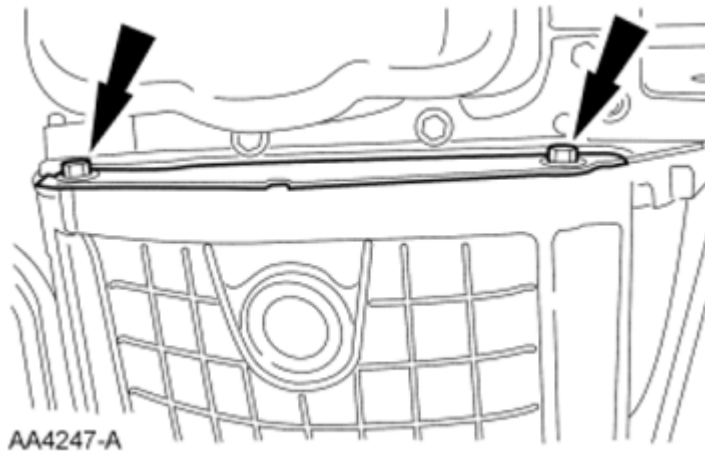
Locating Flexplate Inspection Cover And Bolts
